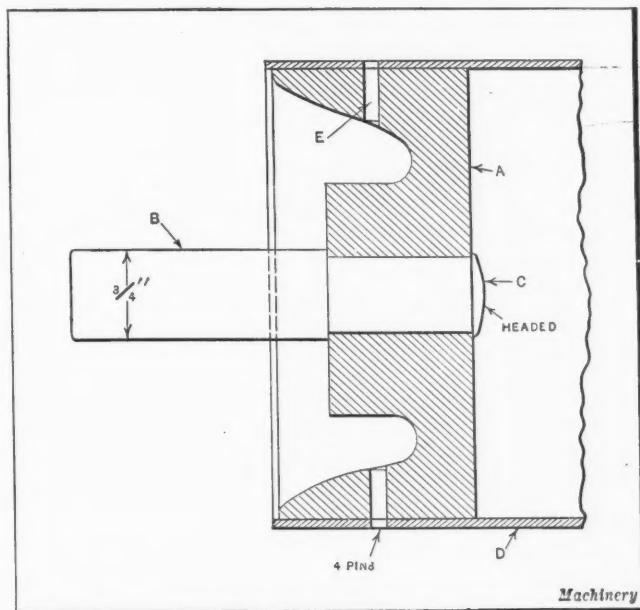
Old-style Bearing replaced by New Design shown in Fig. 2
